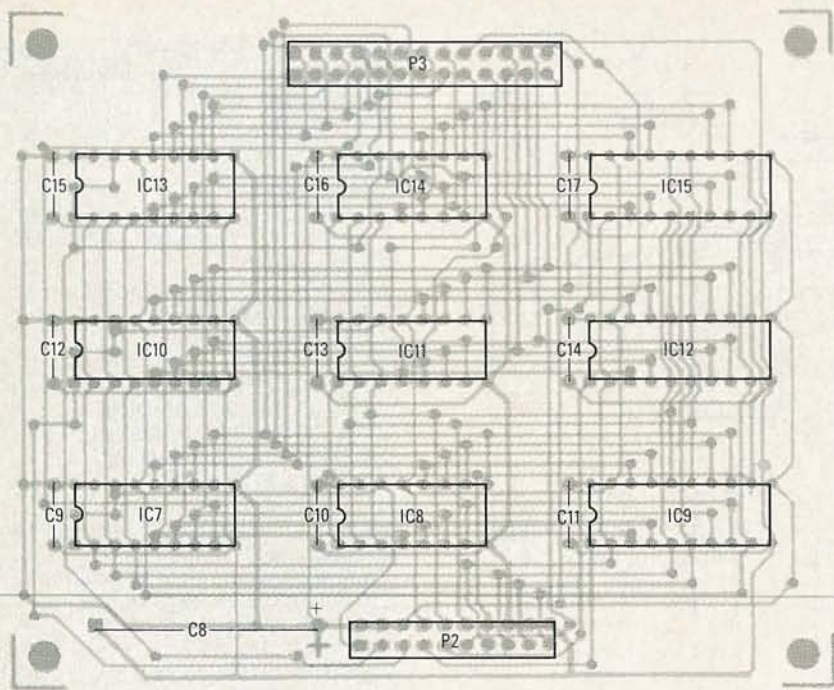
STUFF THE DRIVER BOARD as shown here. Mount all parts on the component side of the board.
